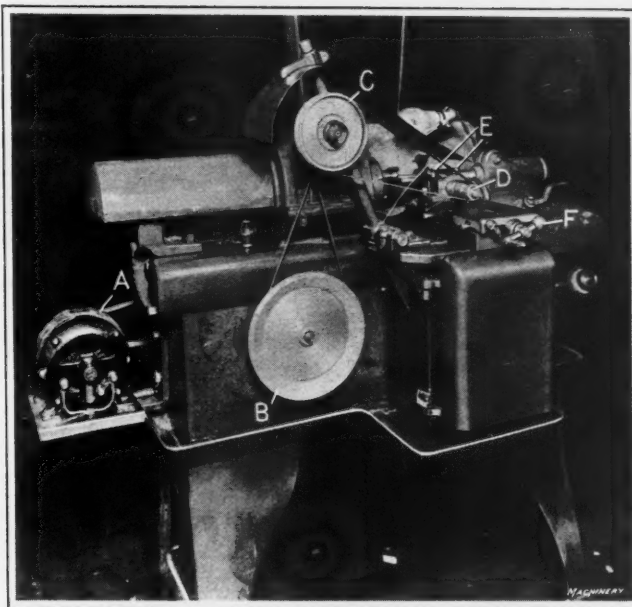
View of Hob-grinding Machine showing Method of driving Grinding Spindle and setting "Grinding Point" for Different Sized Hobbs
